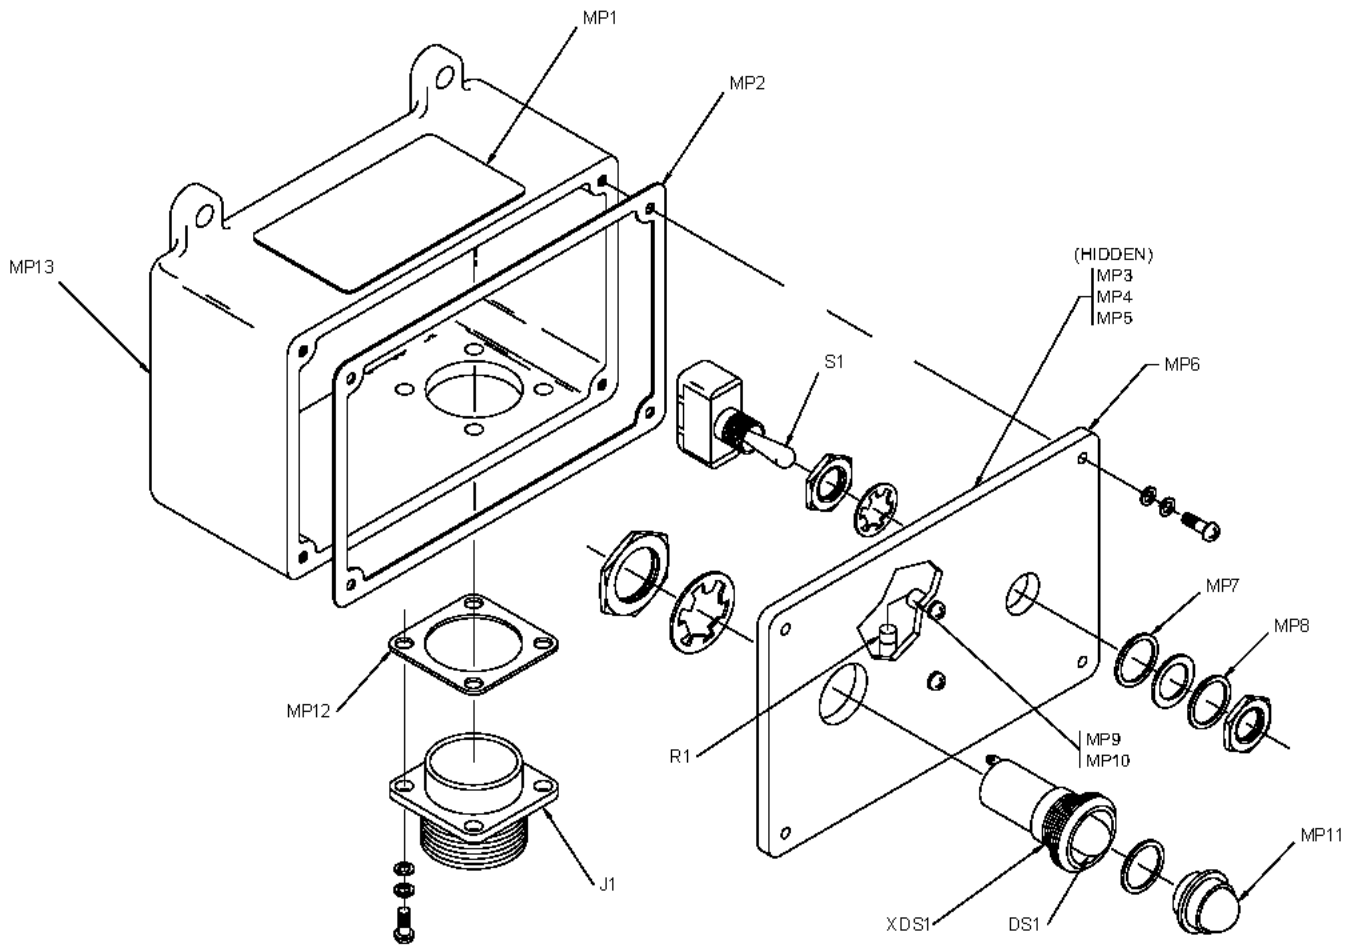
Remote Control Unit (Unit 4), Exploded View
